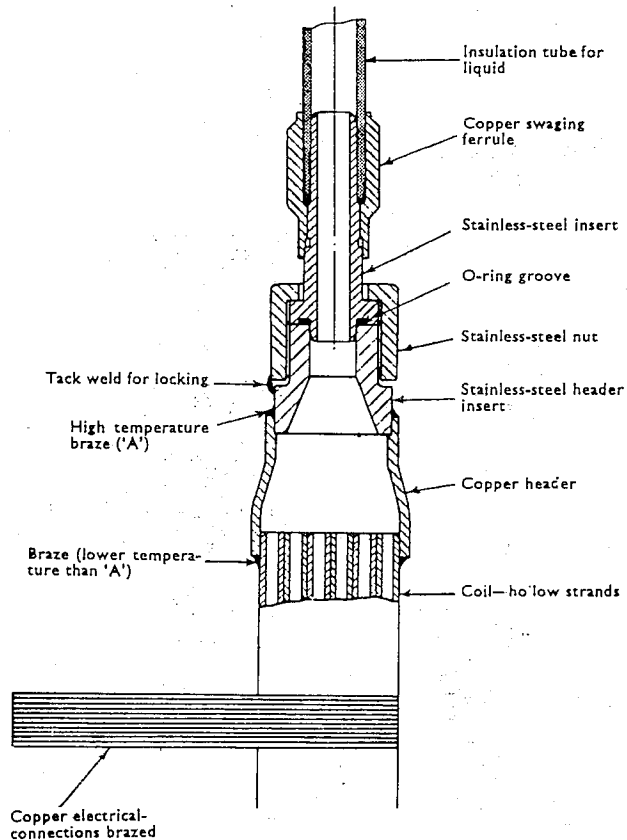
Section showing end connections of the liquid-cooled stator coil to the hose assembly which leads to the manifold.
